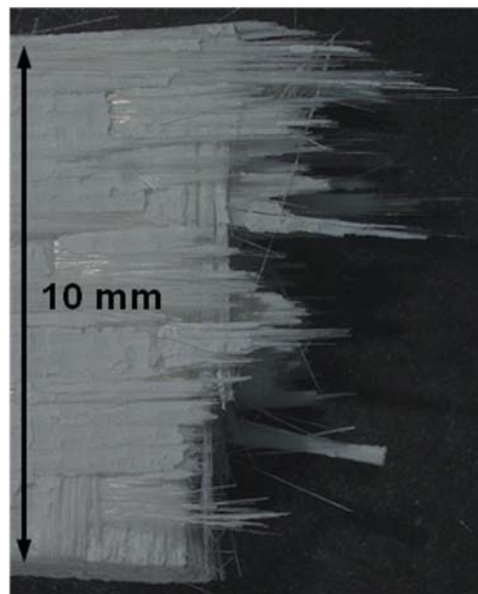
Fracture surface of the N720/AM specimen(2) tested in tension to failure with constant loading rate of 25MPa at 1100°C in steam.
